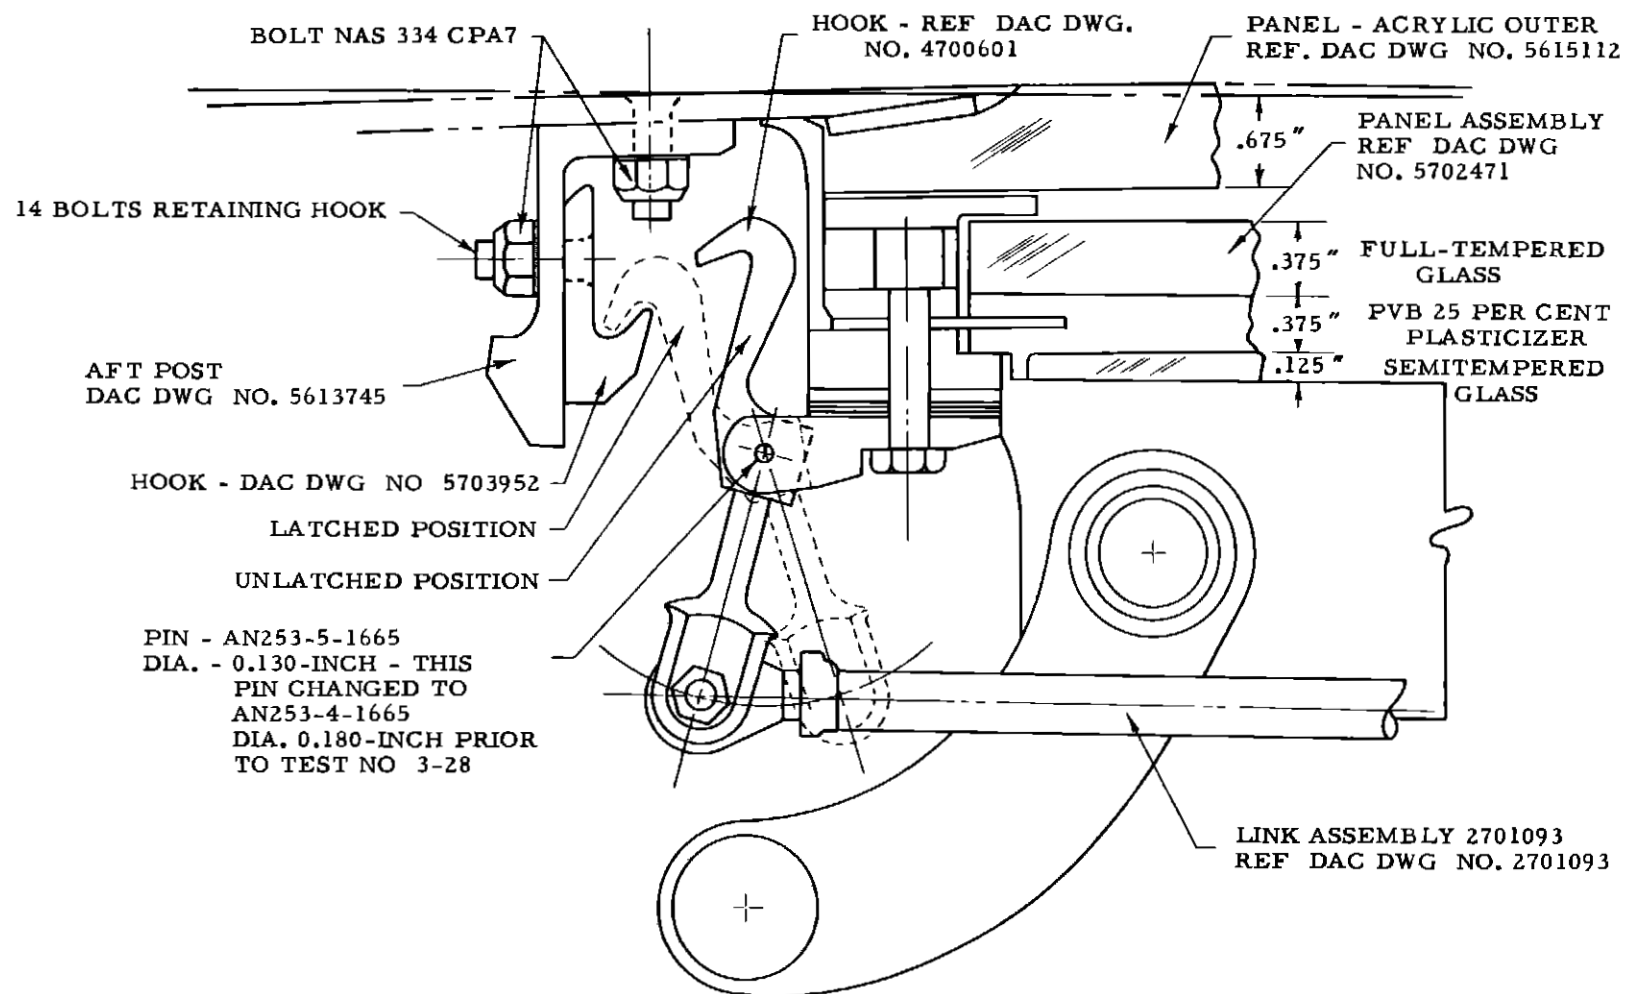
SECTIONAL VIEW OF AFT SILL - CLEAR-VIEW WINDOW ASSEMBLY
